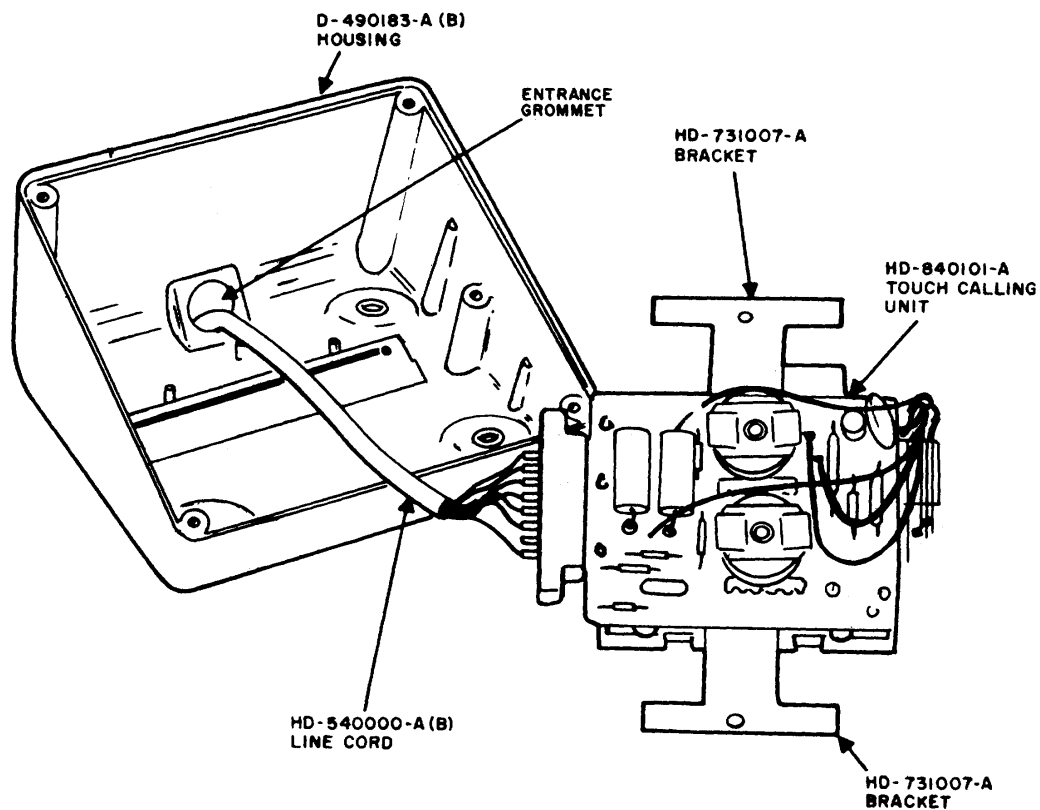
Auxiliary Touch Calling Adapter with TCU Removed.
